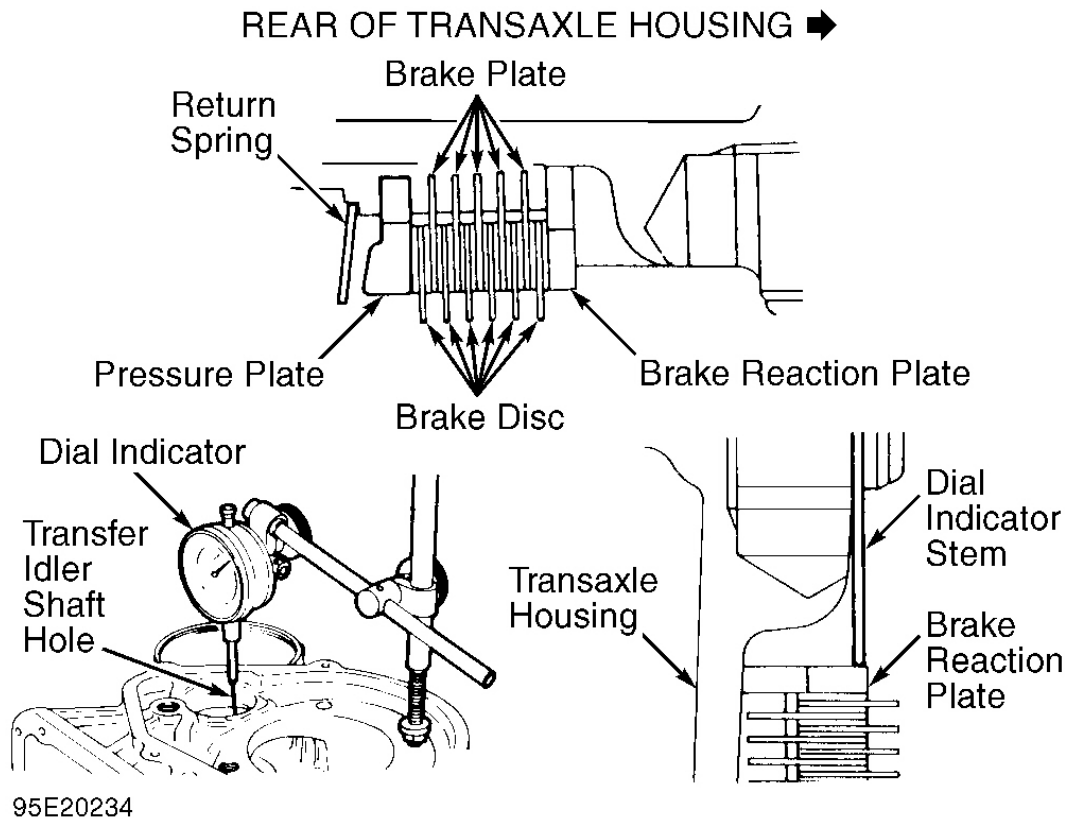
Installing Low-Reverse Brake Components & Positioning Dial Indicator
